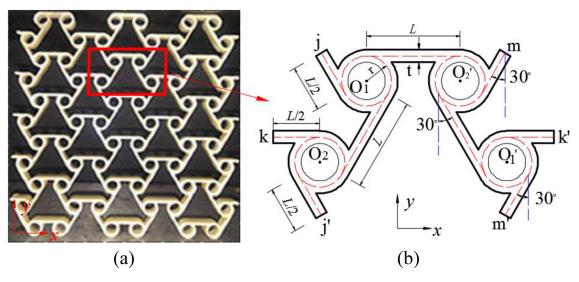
(a) Honeycomb specimen. (b) A cell with dimensions marked.
